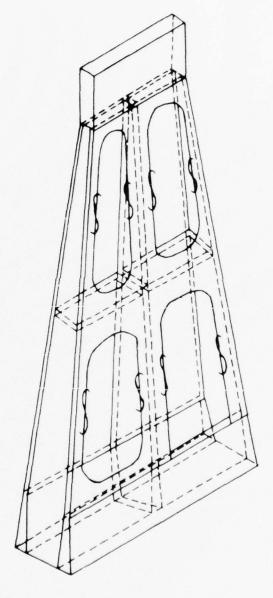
Box-Beam Design with Closure Patches; Single-Sided Butt Weld
